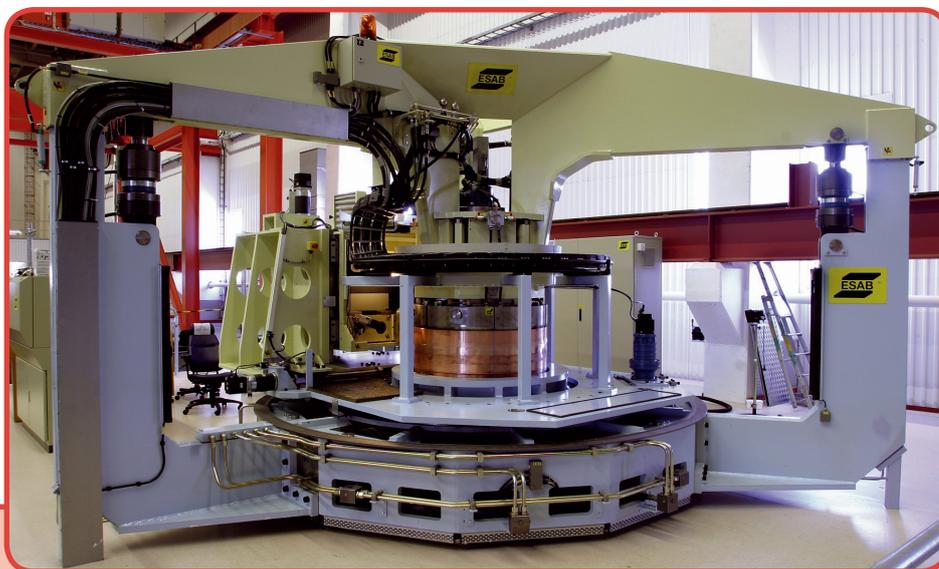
Equipment for Friction Stir Welding to seal a spent fuel canister. Courtesy: SKB.
